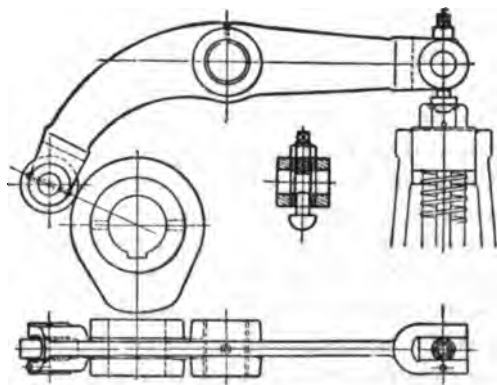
Elements of a gear for operating an air or an exhaust valve.
